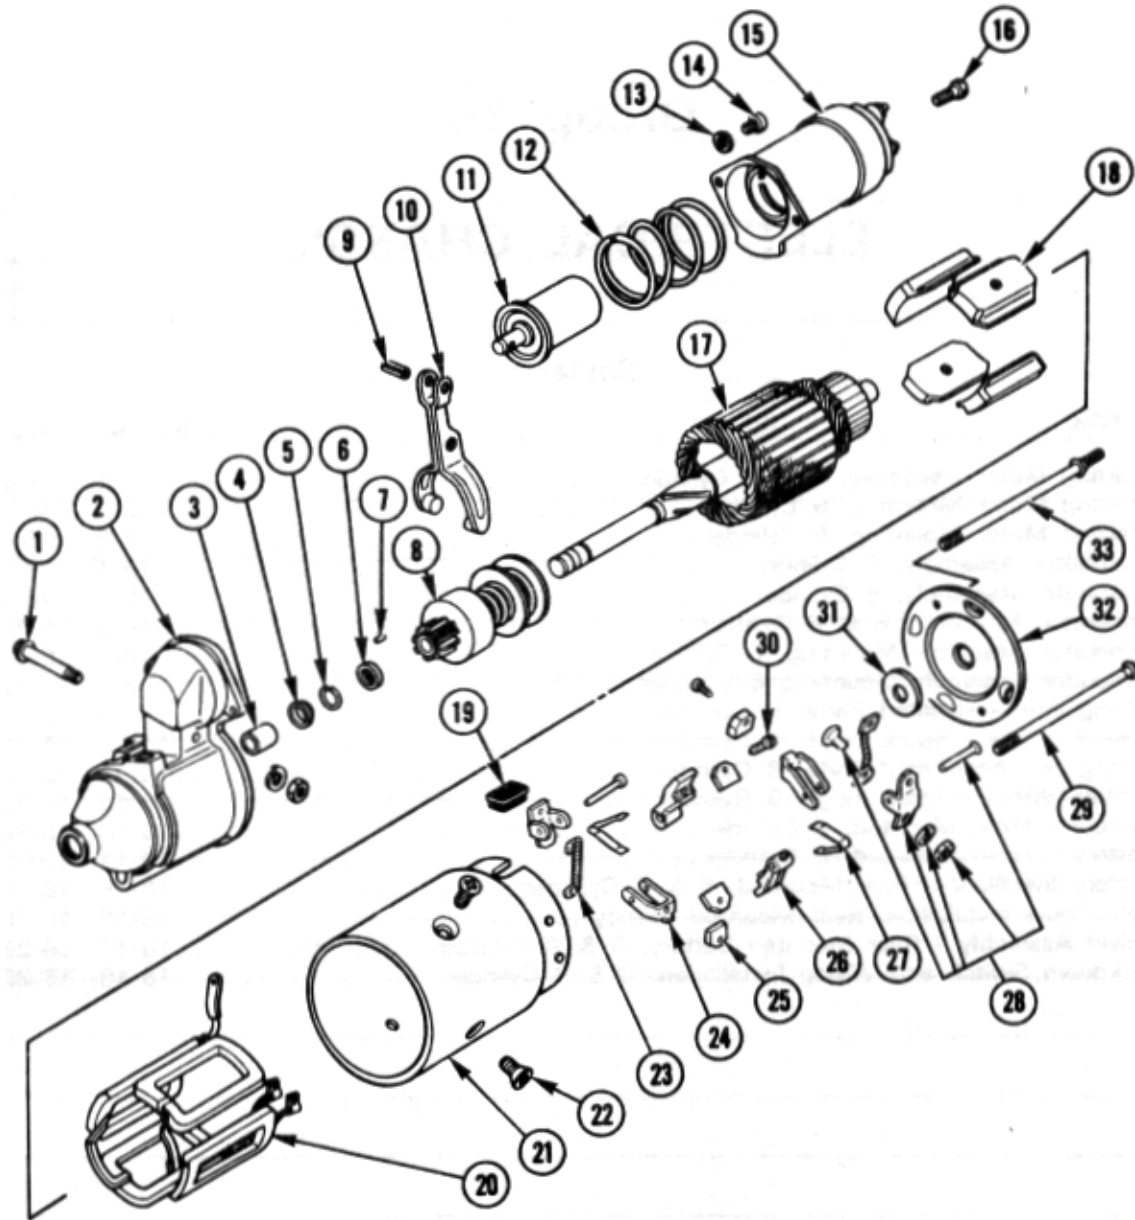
Starting Motor Assembly, 6 & 8 Cylinder
